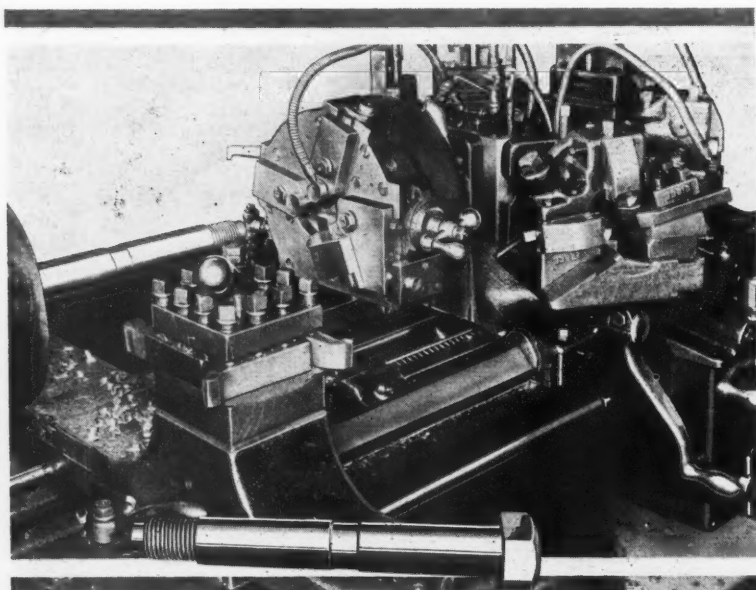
Foster Universal Turret Lathe with Taper-turning and "Quick-size" Adjustment Features, Machining Locomotive Frame Bolts in Less Than One-third the Time Previously Required—Maximum Diameter of Bolt 2 Inches; Tapered Part, 12 Inches Long; Straight Threaded End, 3 Inches Long; Floor-to-floor Time, 1 Minute, 55 Seconds
